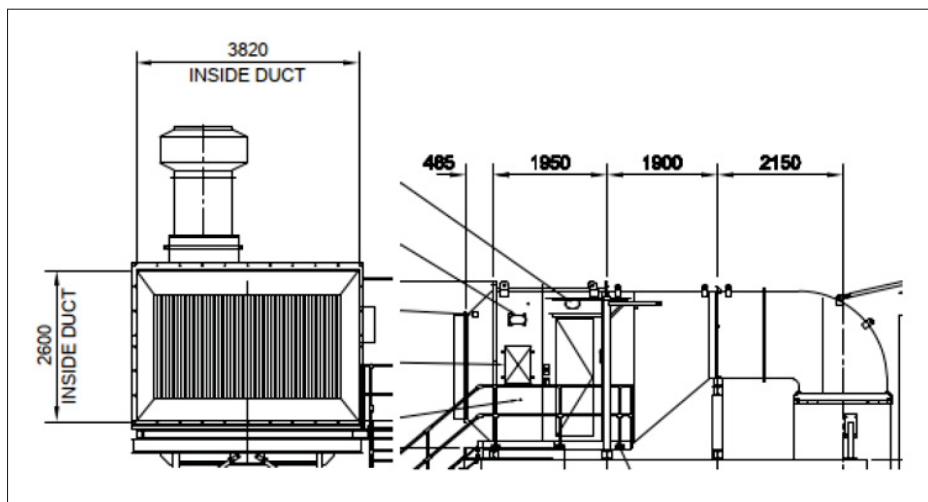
Air filter dimension from the previous model of Gas Turbine Package
